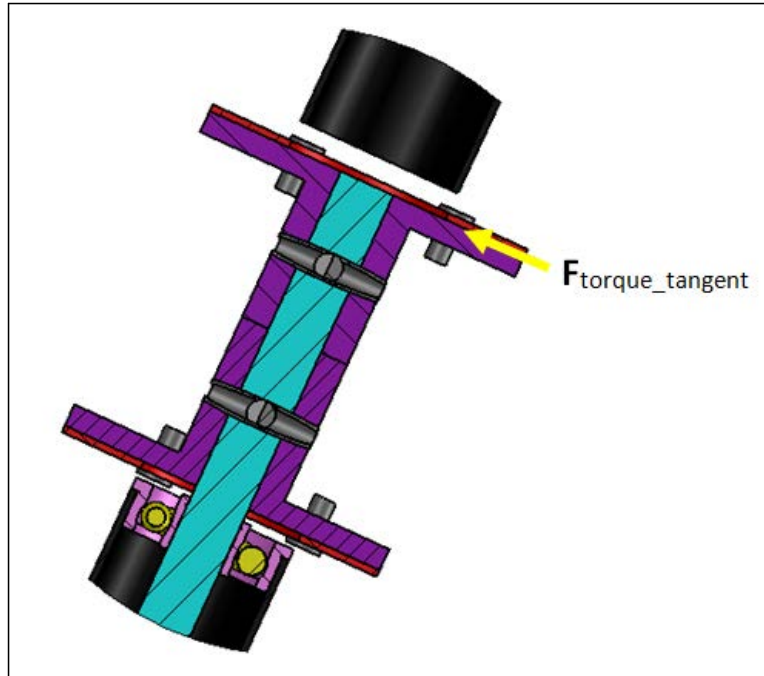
Cross-Section of Rear Sprocket Half Spools including the Force due to Torque
